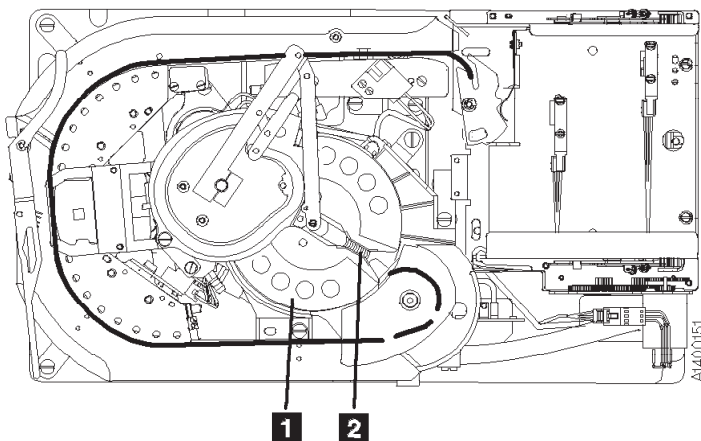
Example of Operation Stopped with Tape on Machine Reel
